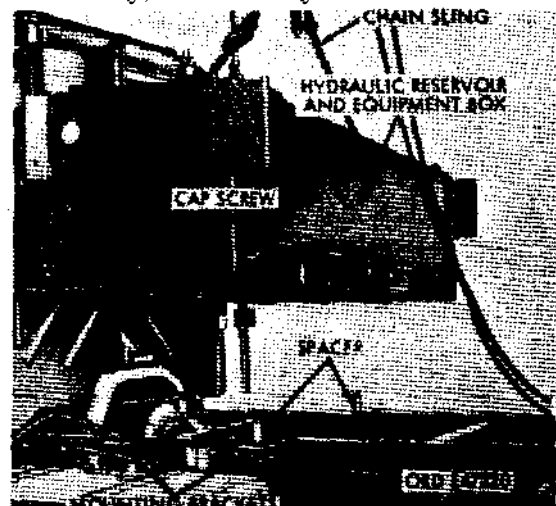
Removing hydraulic reservoir and equipment box (M62)
